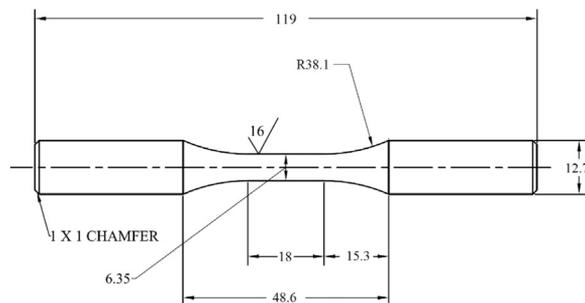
Geometry and dimensions of round fatigue specimens with uniform gage section per ASTM standard E606/E606M-12 [2,3]. All dimensions are presented in mm.
